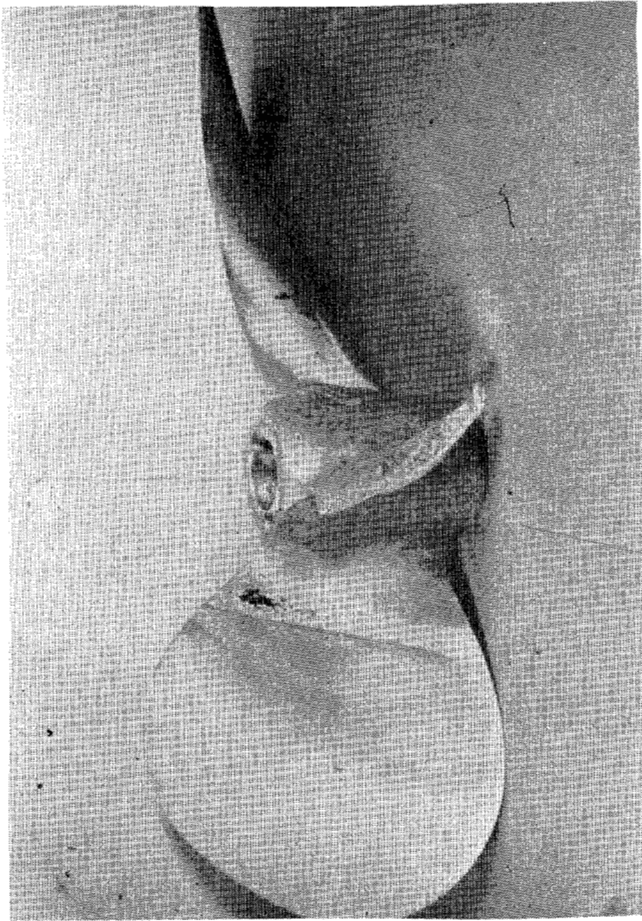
Propeller showing corrosion fatigue failure and erosion/corrosion damage
